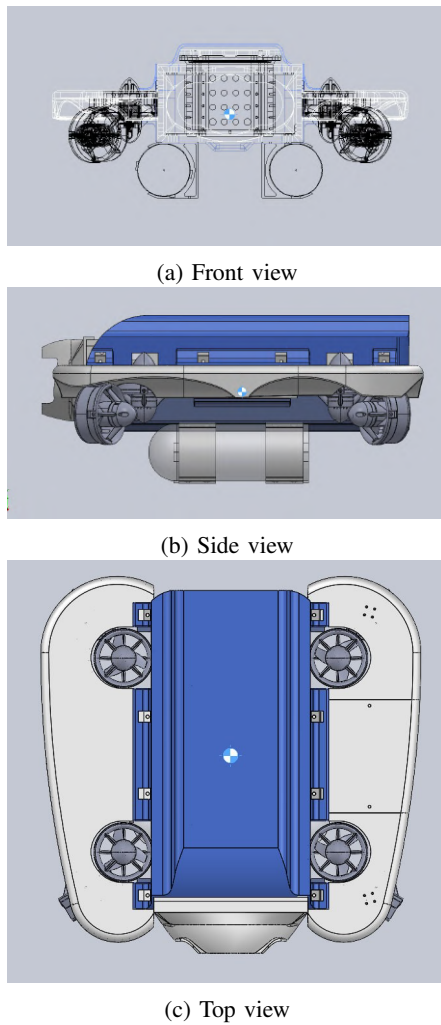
Kraken CG analysis: (a) front view, (b) side view, and (c) top view.
